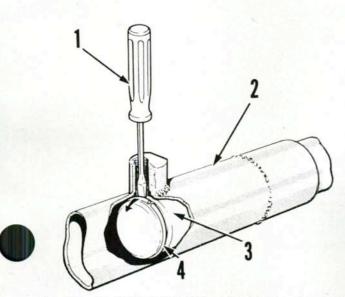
To disassemble lift assist cylinder (2), insert a screwdriver (1) through cylinder port and pry retaining ring (4) off the piston (3).
